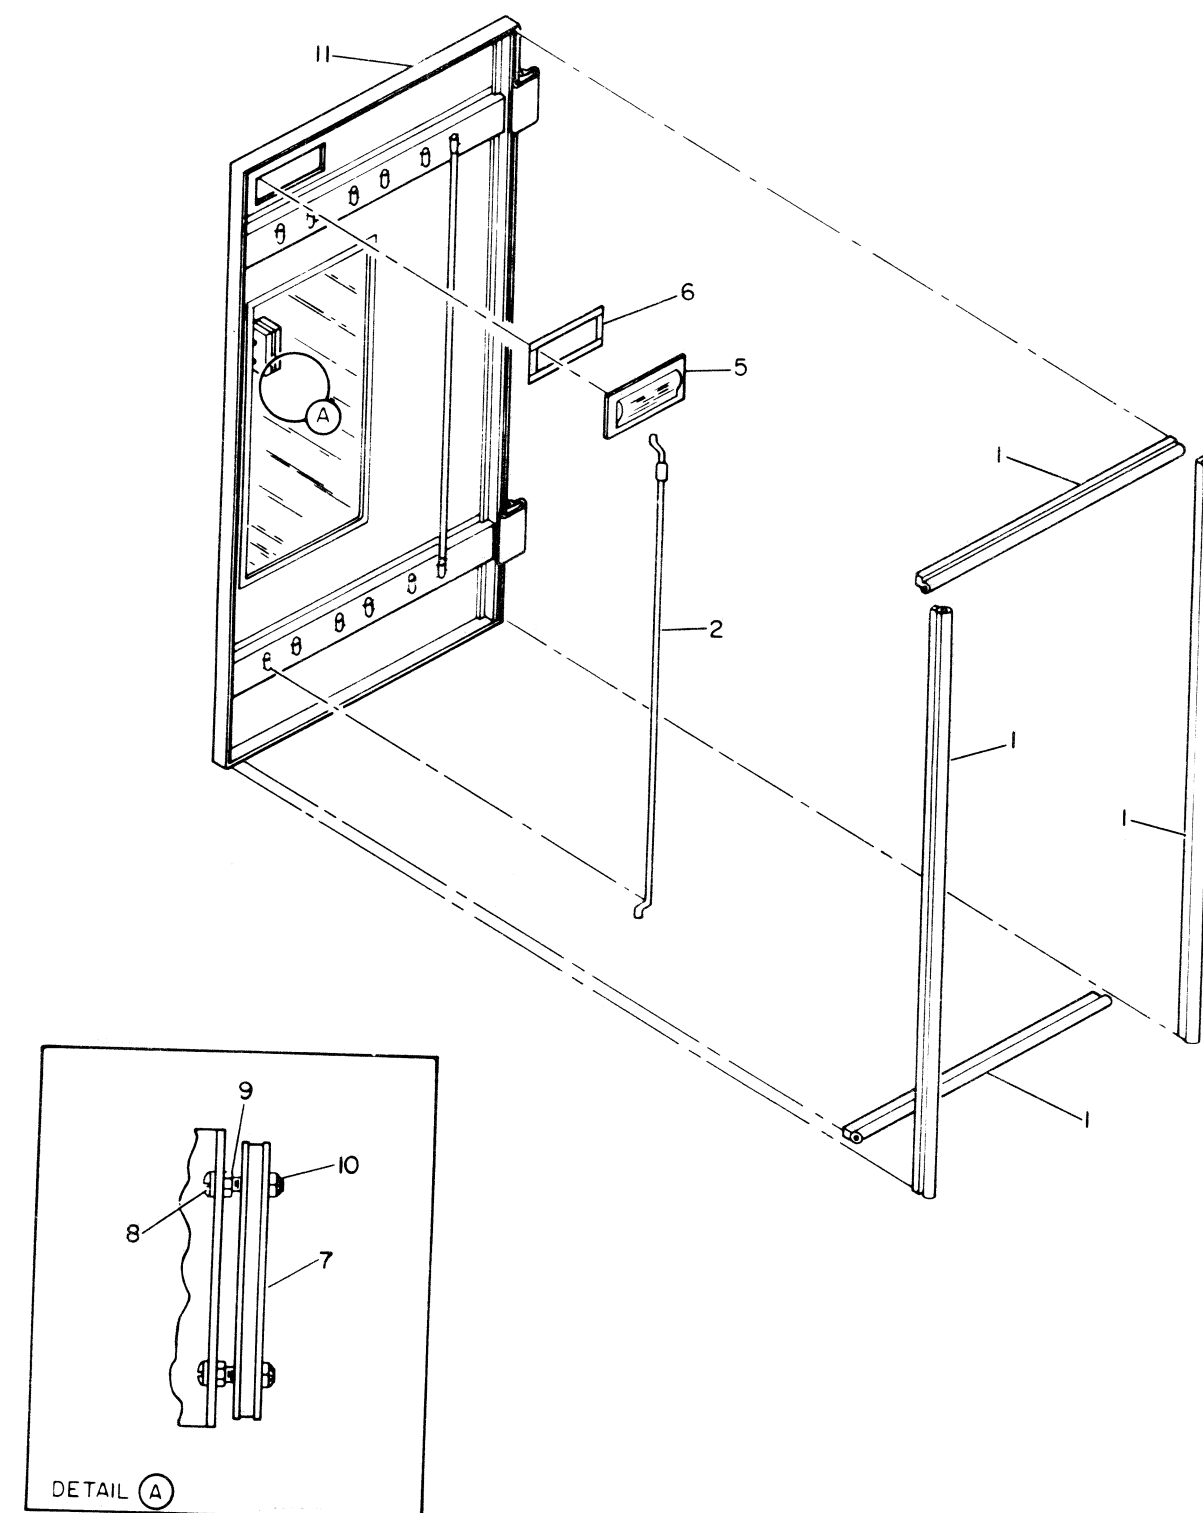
REAR DOOR ASSEMBLY. SEE LIST 3.
